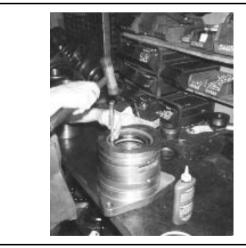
(MSSM0303AE) Installing Seals in Bearing Housing
